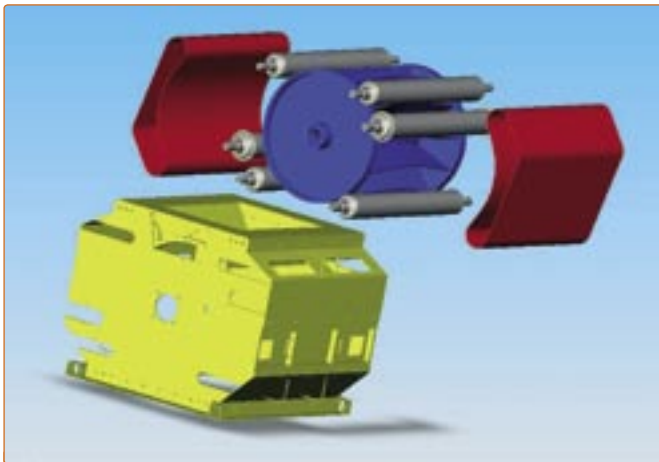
Explosion drawing with belts, carcass, idlers and rotor.
